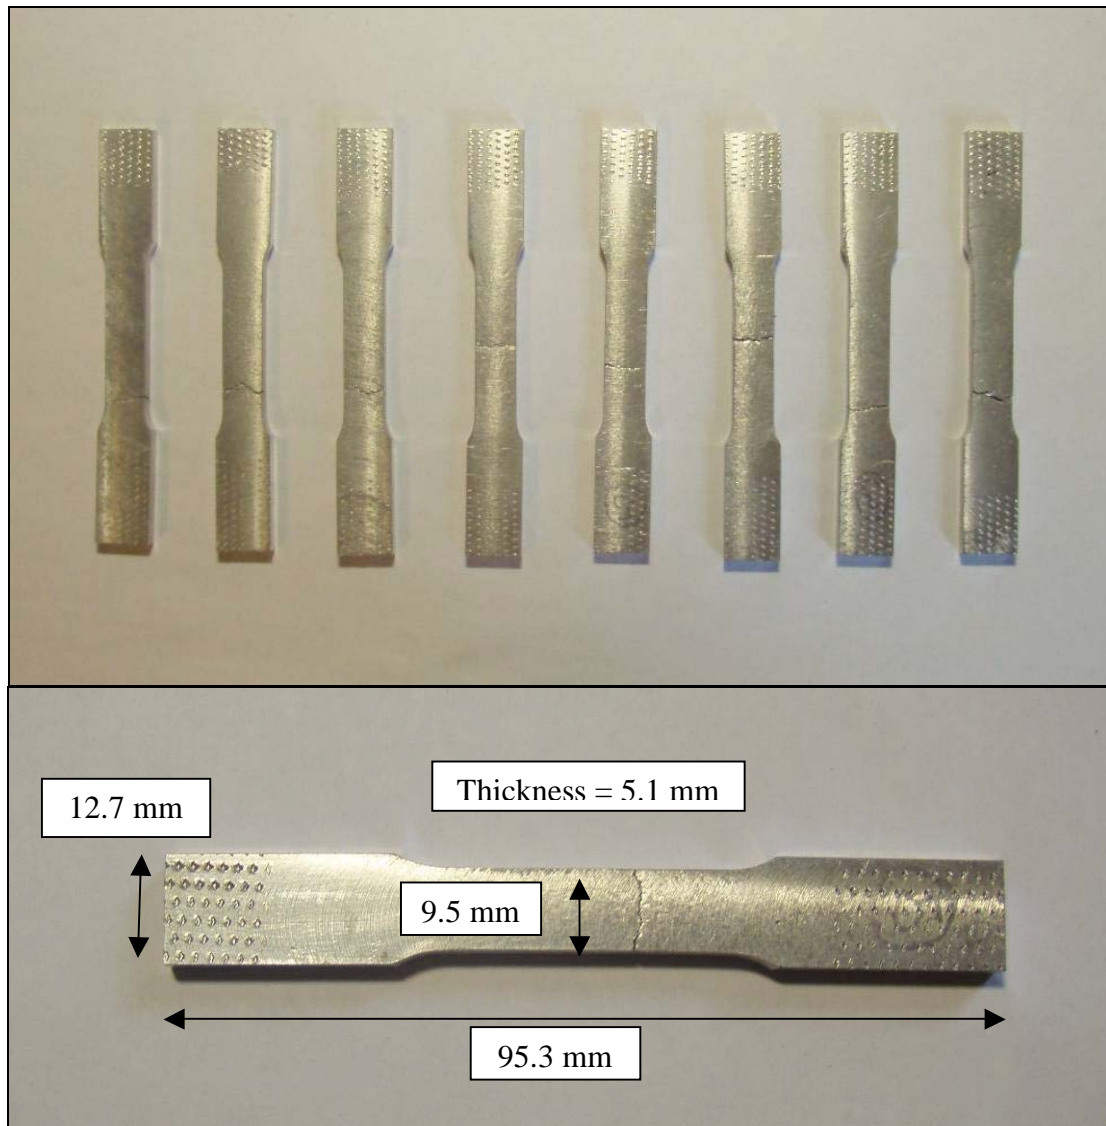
Eight tensile test specimens after testing (above) and individual test specimen (below).
